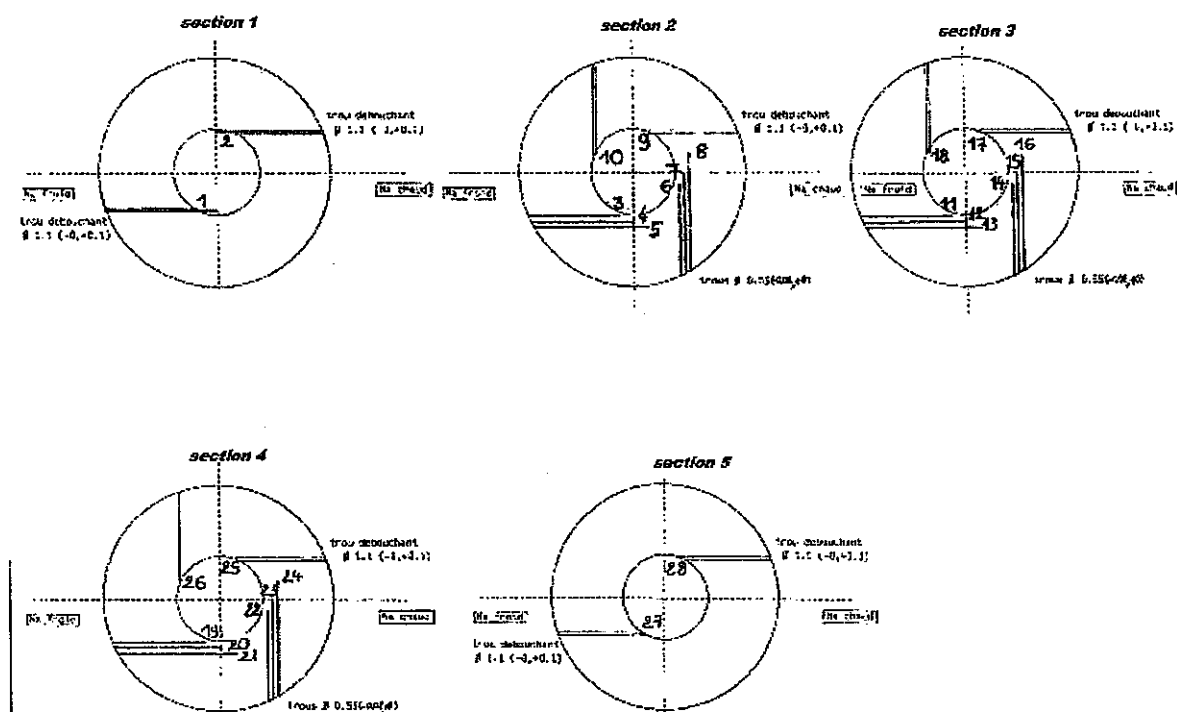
Cylindrical test piece made of 316L(N) steel, locations of thermocouples of the thermal specimen
